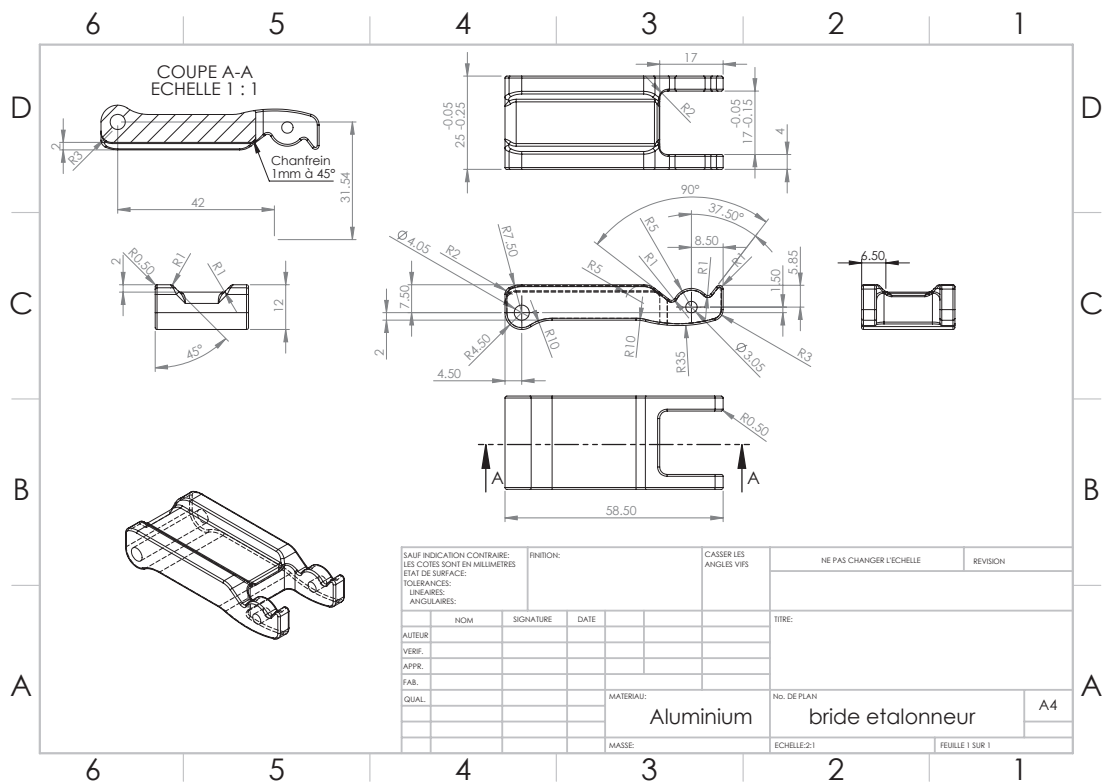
Dimensioned drawing of the flange of the calibrator. Provided by CTTM.
